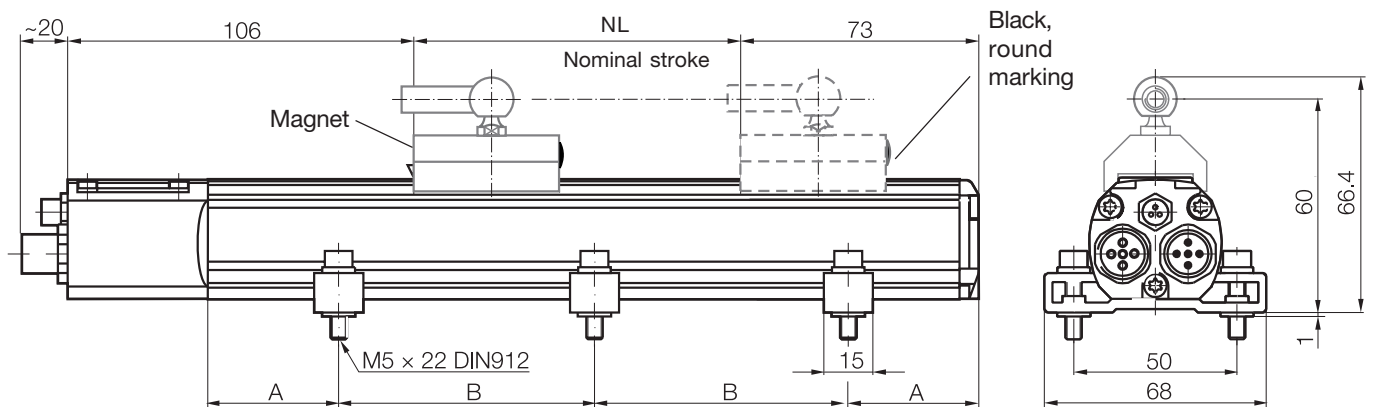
Dimensional drawing (BTL5...P-S103 transducer with captive magnet BTL5-F-2814-1S)
